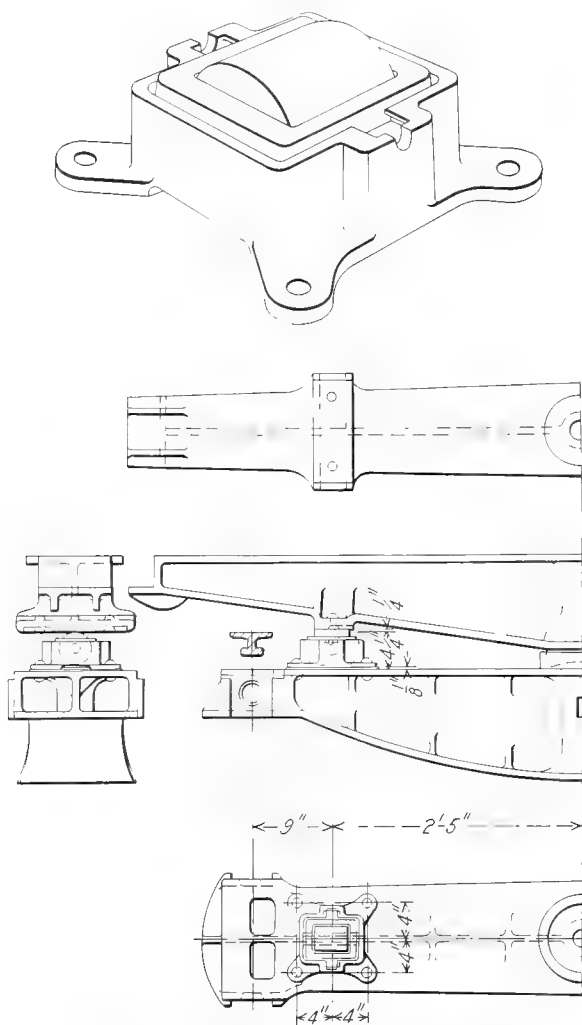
Miner Single Roller Side Bearing as Applied to Truck Bolsters for Freight Equipment. W. H. Miner.
